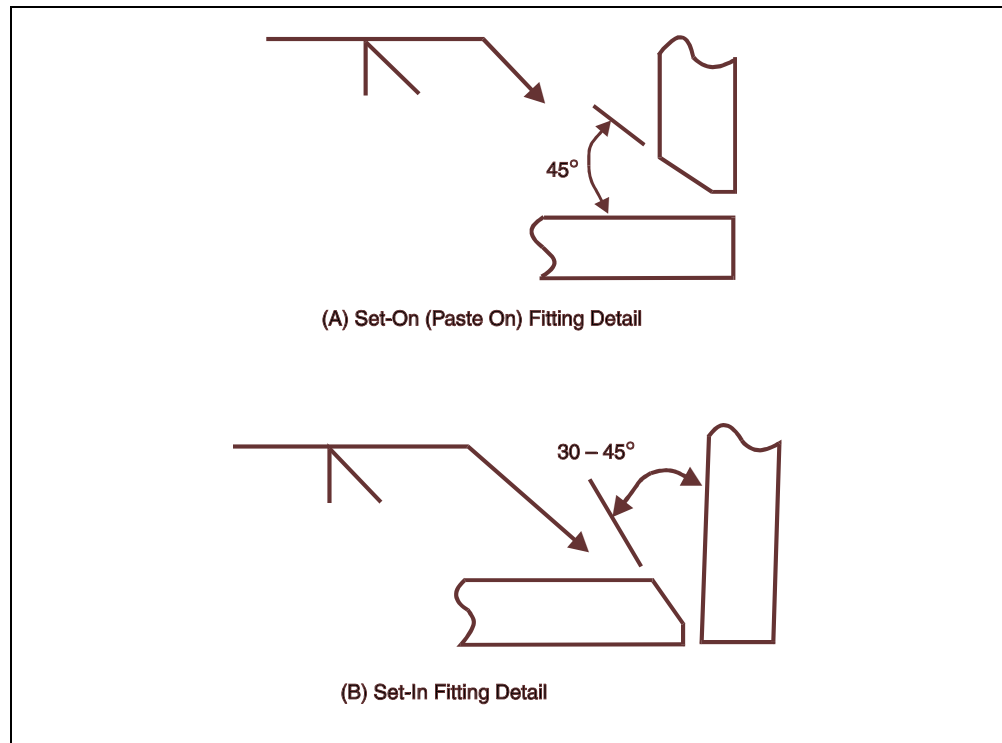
Fillet Welds *(Courtesy of the American Welding Society)
